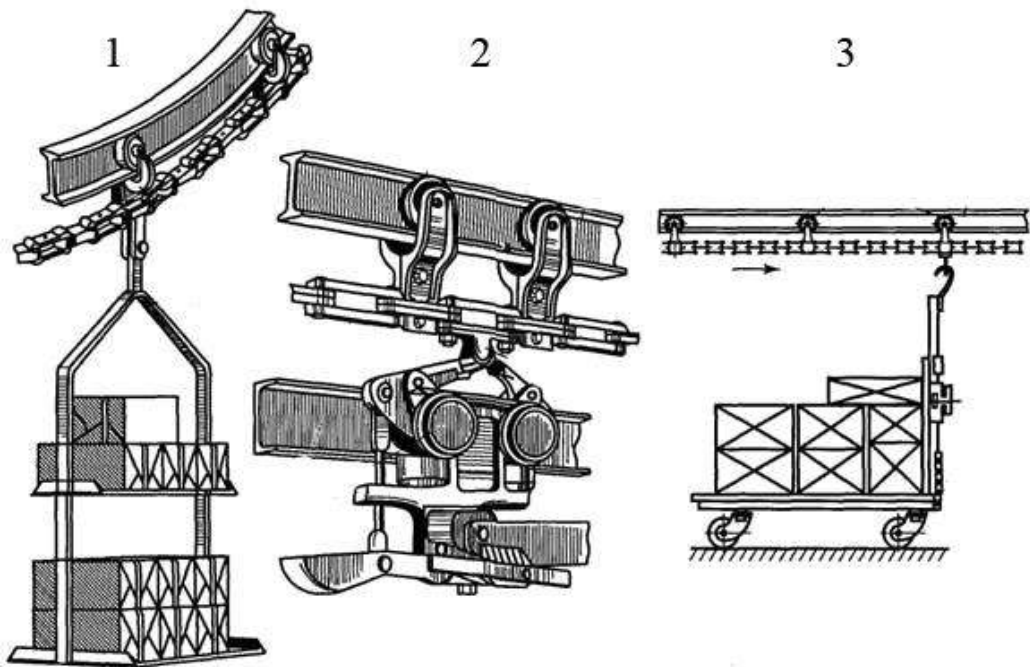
Overhead conveyors: 1 – load-carrying conveyor; 2 – pushing conveyor; 3 – pulling conveyor
